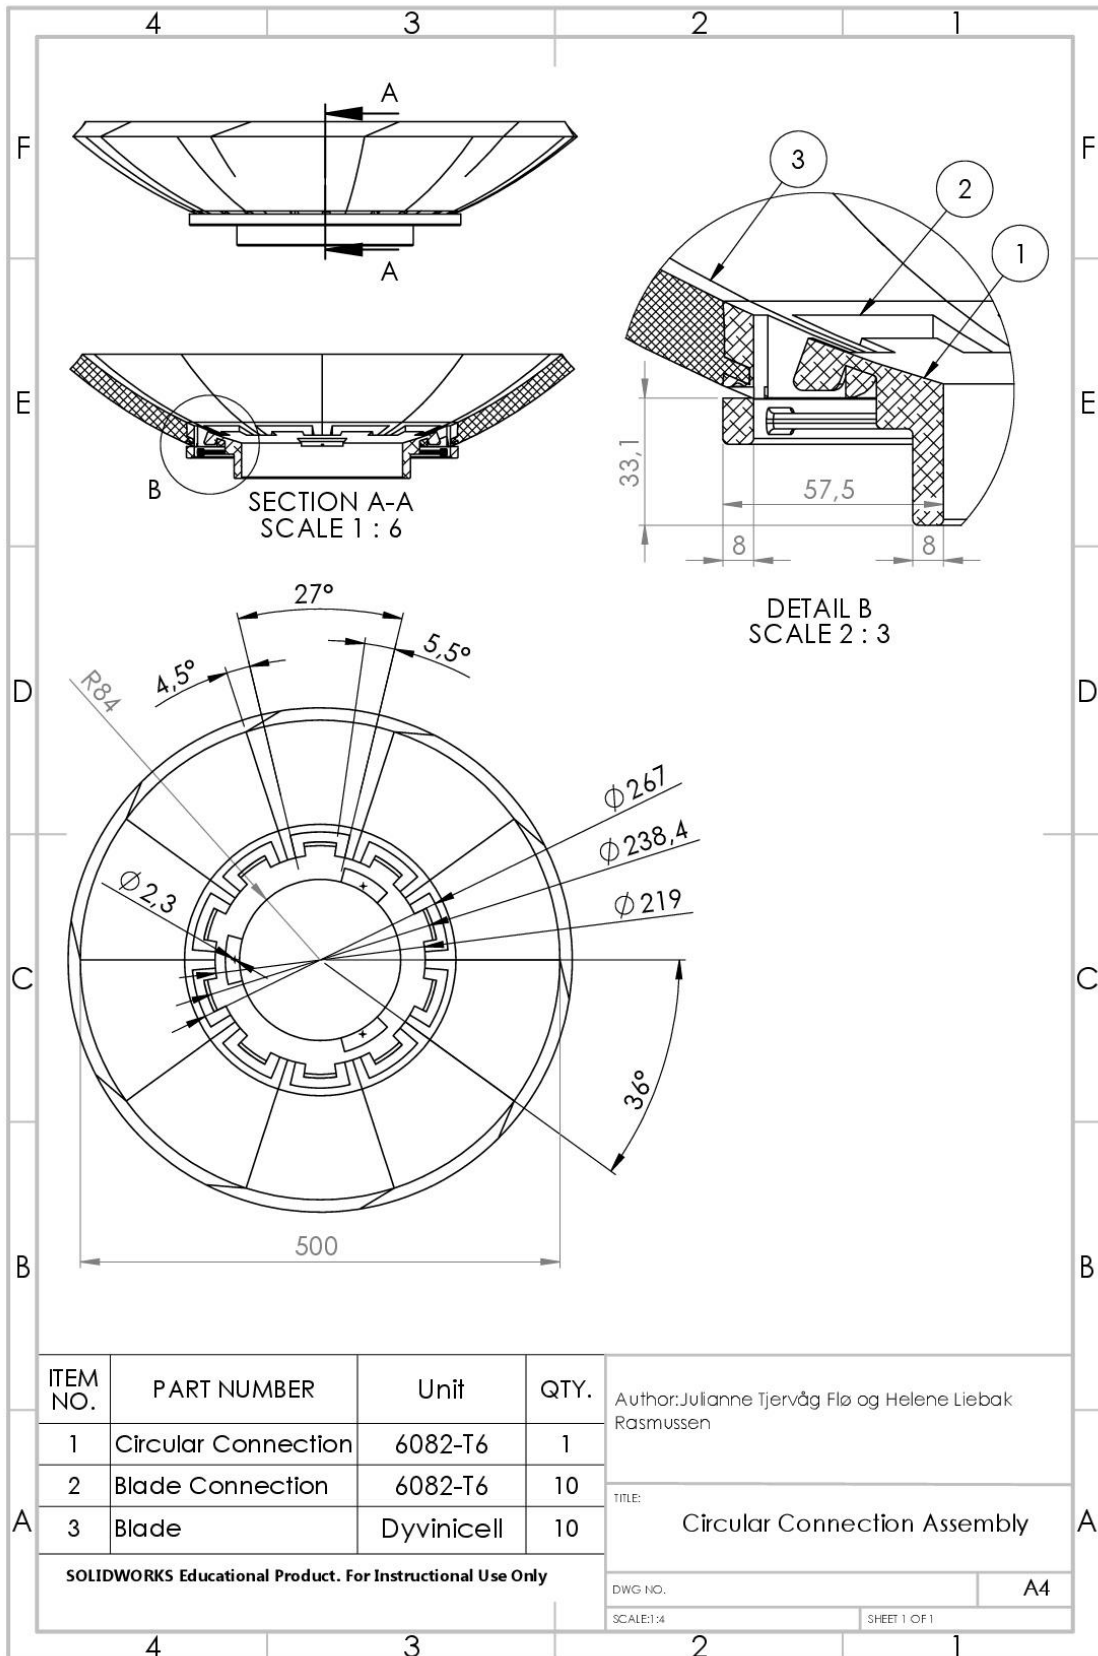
Technical drawing of The circular connection, blade and blade connection. Created in SolidWorks.
